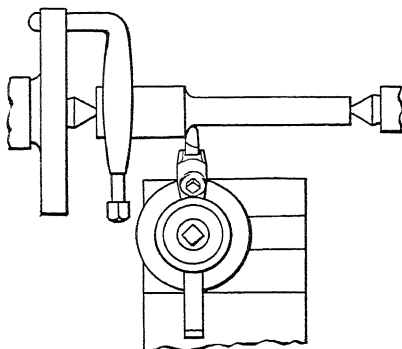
Shows tool post on left-hand side of tool rest. In this position there is less tendency to feed so far that the dog will strike the tool rest.
